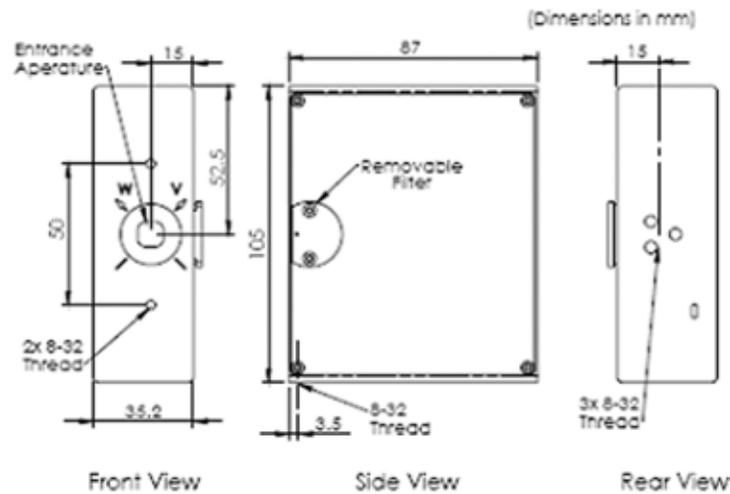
BM-7 InGaAs Detector Head Dimensions
